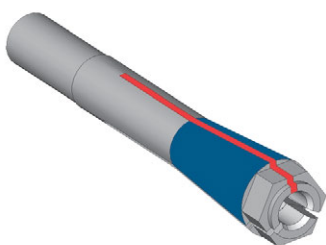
GREASING THE COLLET CHUCK; SURFACE IN WHICH GREASE IS TO BE APPLIED IS MARKED IN BLUE; SLOT THAT MAY NOT BE GREASED IS MARKED IN RED
